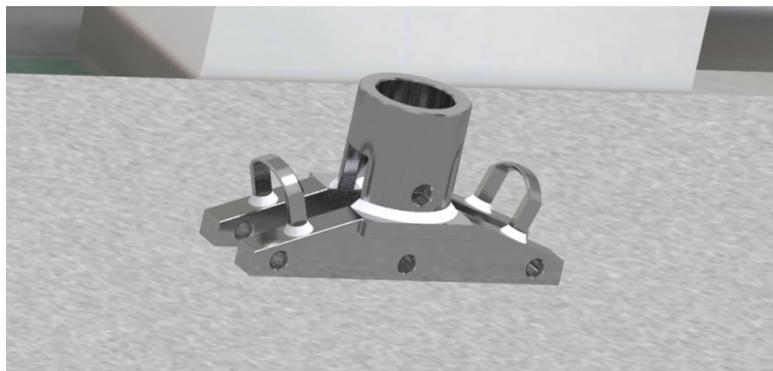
Holder model for regeneration wing propellers on the universal lathe
